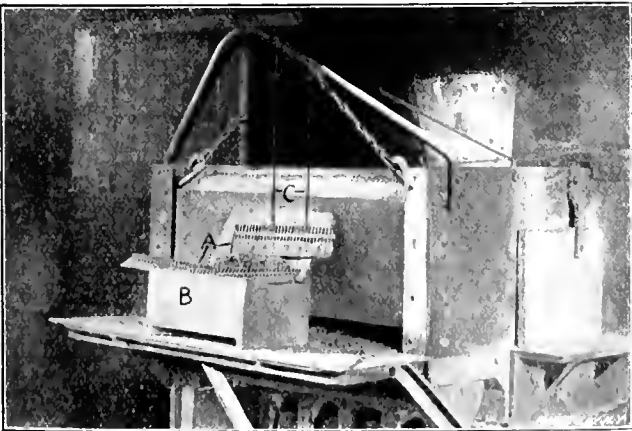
View showing Method of Bunching Jaws for Carbonizing
